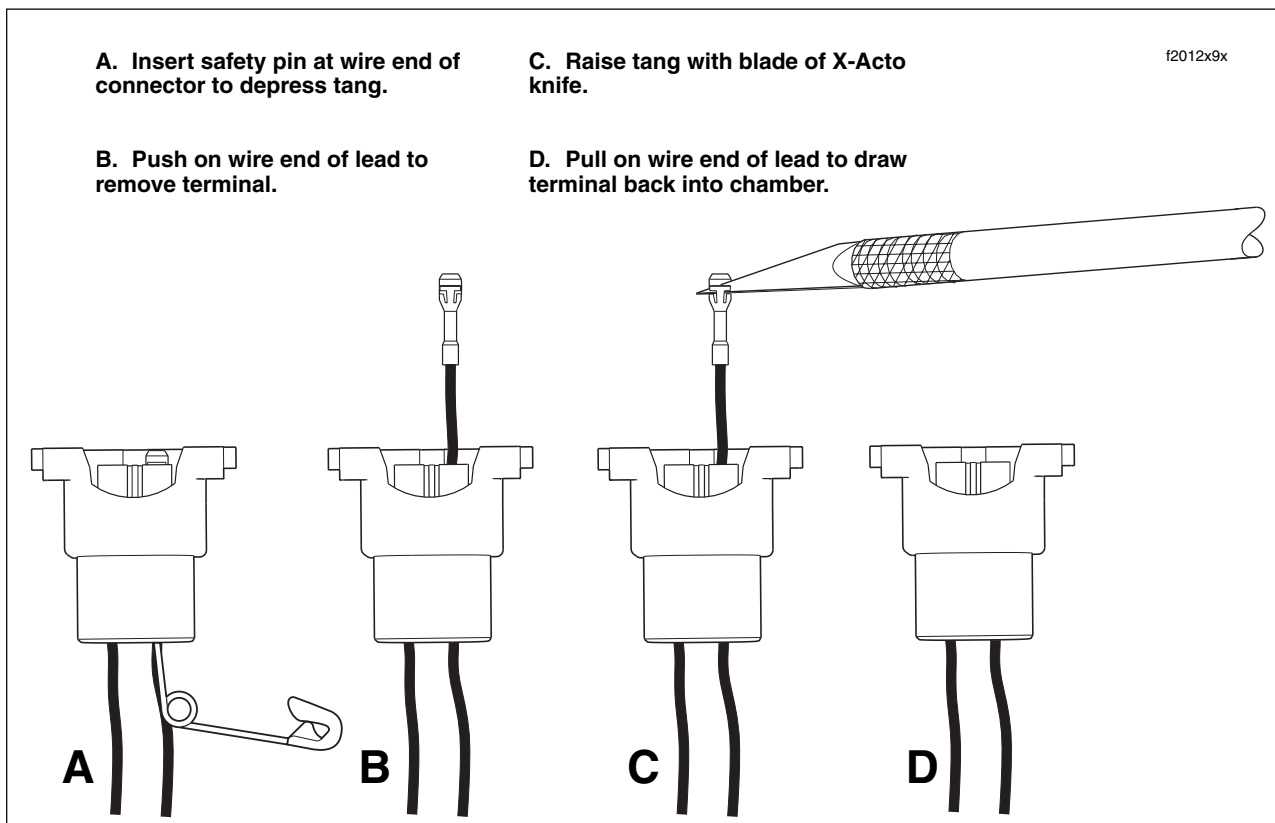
Extract/Install Socket Terminal at Mating End of Connector
